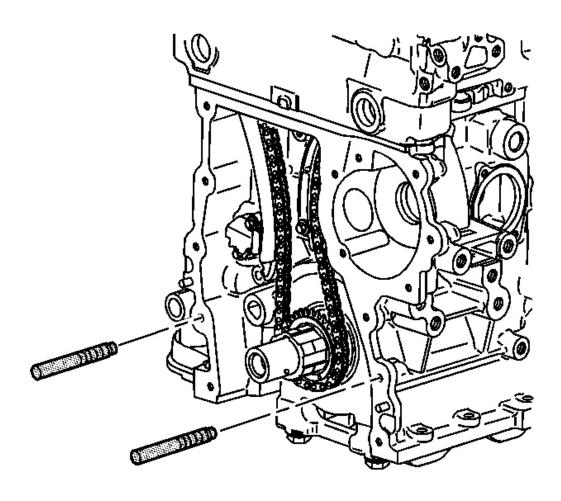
Installing J 44219 Into Engine Block Courtesy of GENERAL MOTORS CORP.
